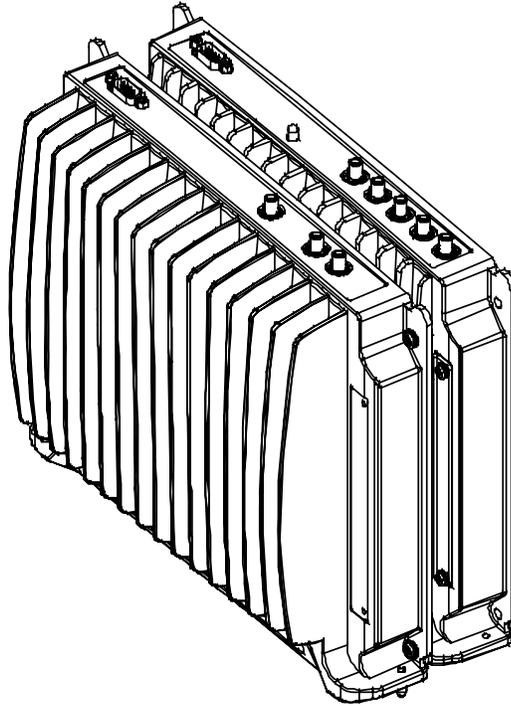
RHU Add-on to 1000 RHU Completed Assembly
